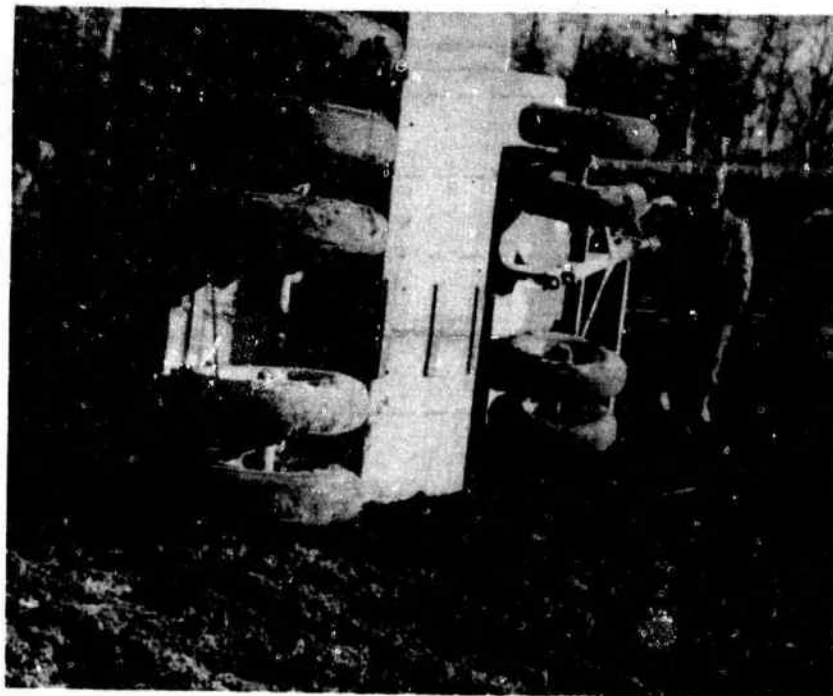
ROLLER BODY WELDED AND REASSEMBLED
